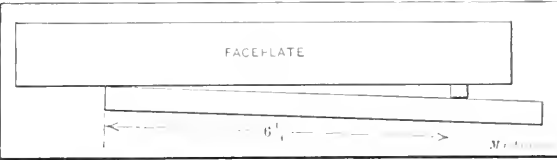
Method of locating Scale for grinding One Side to Required Taper
